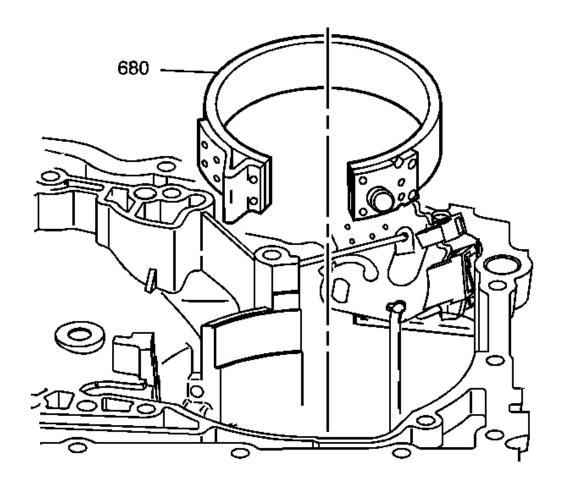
View Of Manual 2-1 Band Assembly Courtesy of GENERAL MOTORS CORP.
